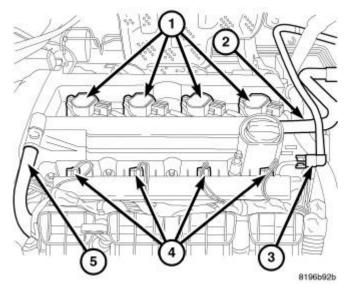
Ignition Coils, Air Hose, Fuel Line, Injectors & PCV Hose Courtesy of CHRYSLER GROUP, LLC
